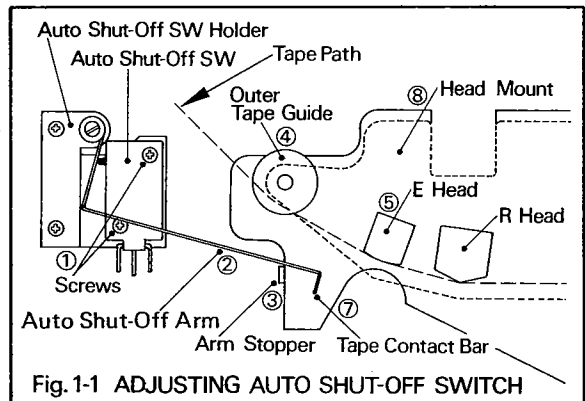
ADJUSTING AUTO SHUT-OFF SWITCH
